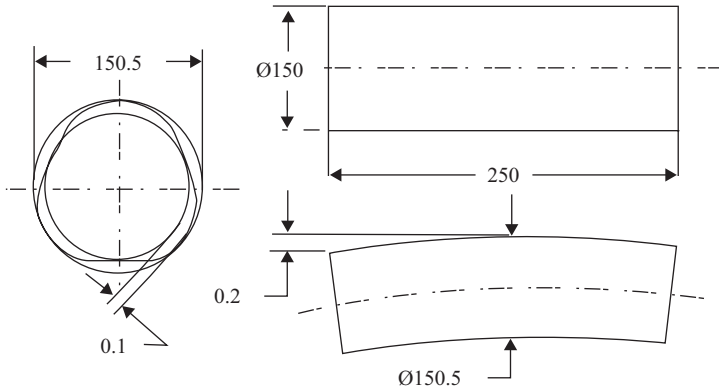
Possible good part that meets diameter tolerance
